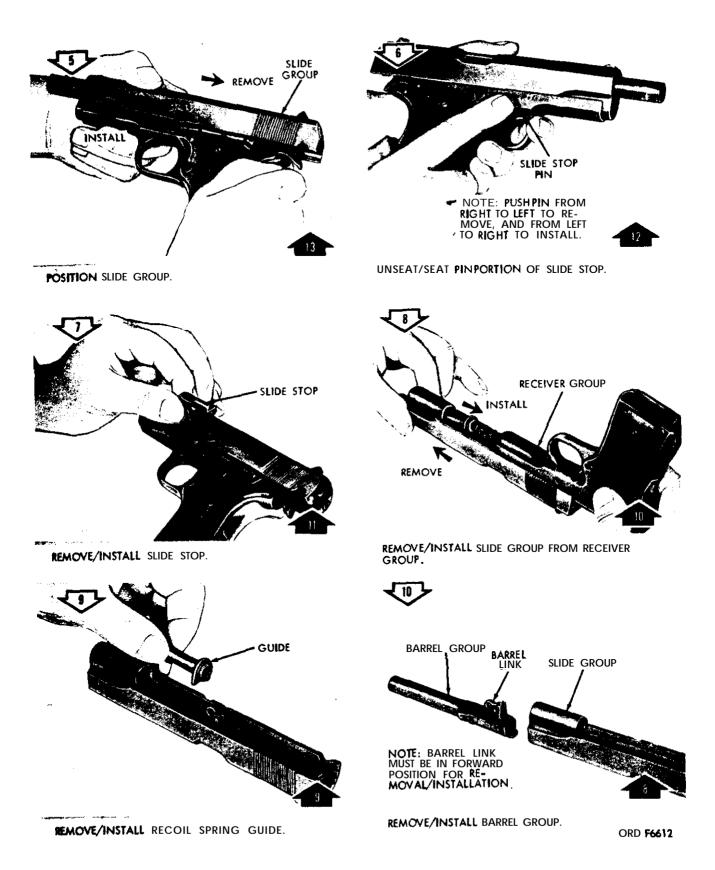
Disassembly/assembly of barrel and slide group (2 of 4).
